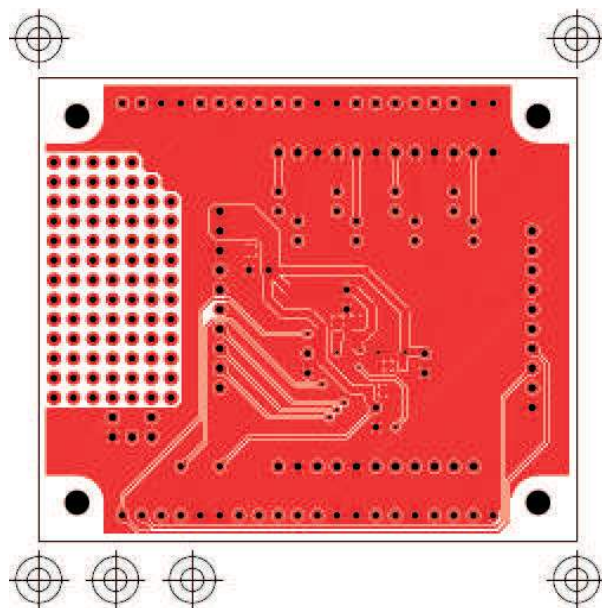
DEM-PCM1780/1781/1782 Bottom View
